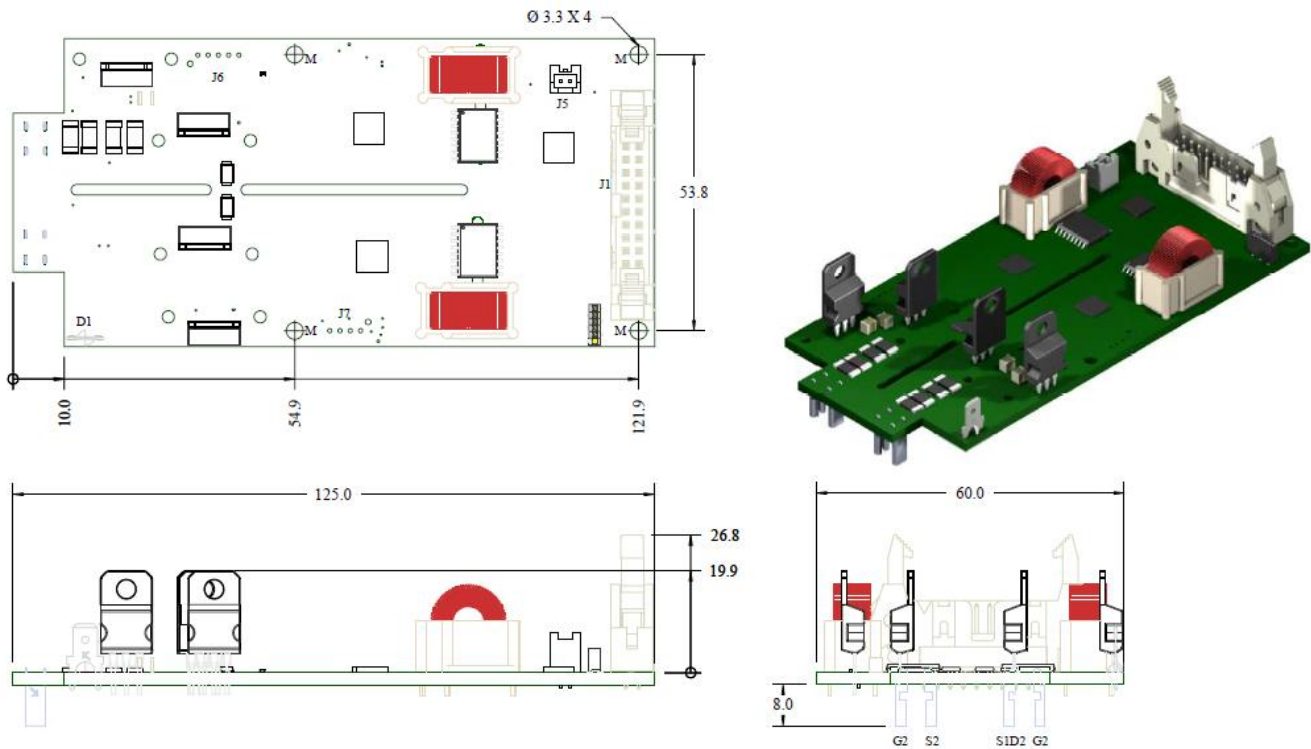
Dimensions of the 62EM1-62mm Electrical Gate Driver (+/- 0.1mm)
